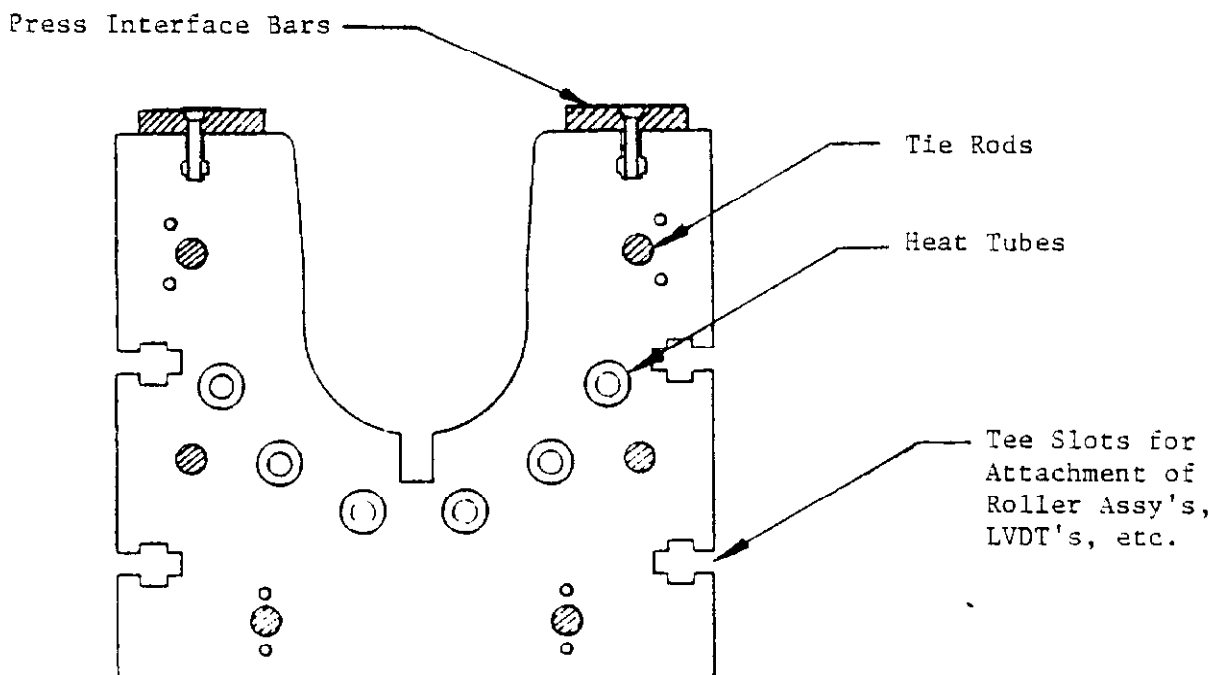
Laminated Outer Coil Mold Assembly - Length = 56'
